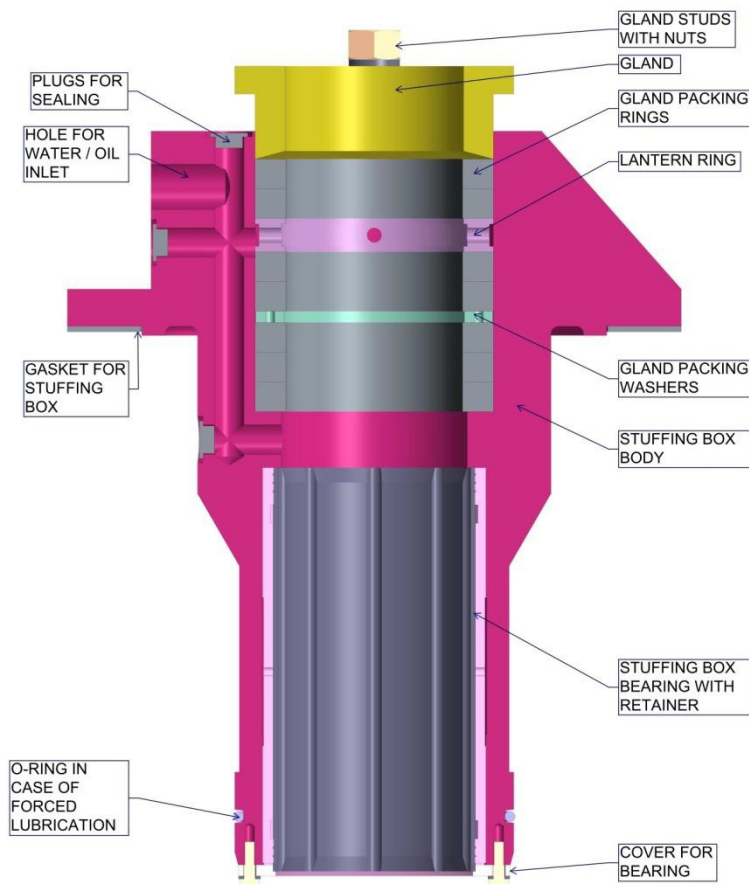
General Cross Section of Stuffing Box And Gland Assembly
